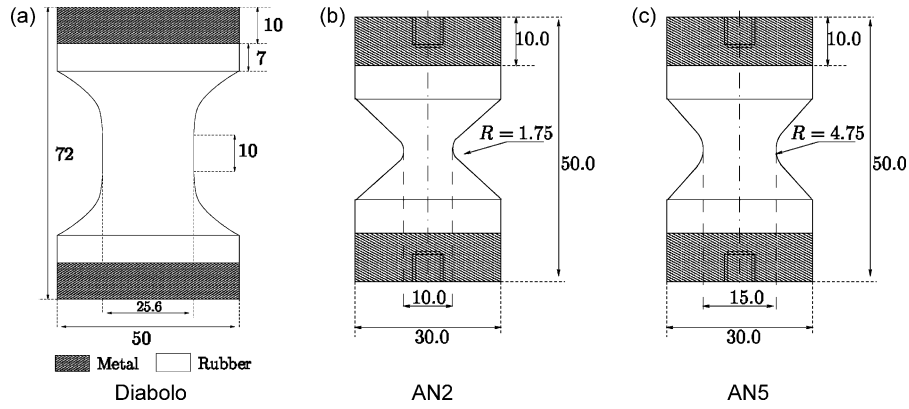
Specimens geometries used for fatigue tests (dimension in mm).
